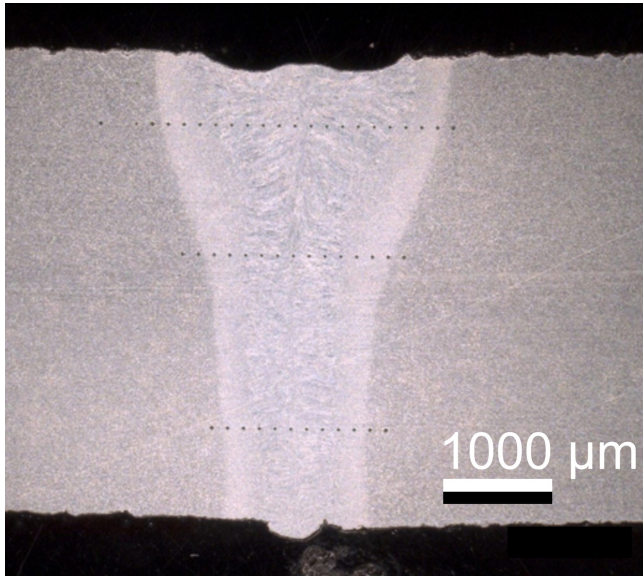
Specimen type with laser-welded butt joint, sheet thickness 6 mm, cross-section of the seam; samples provided by Fraunhofer IWS.
